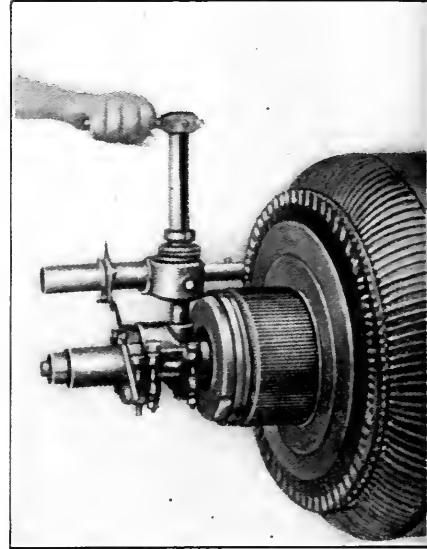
COMMUTATOR-TRUING DEVICE MOUNTED ON THE ARMATURE SHAFT AND OPERATED BY HAND
